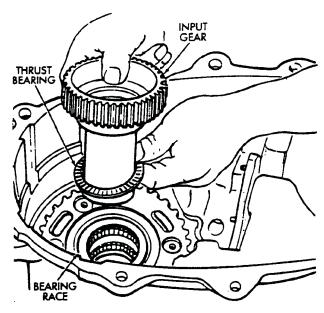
Install Input Gear, Thrust Bearing and Race
